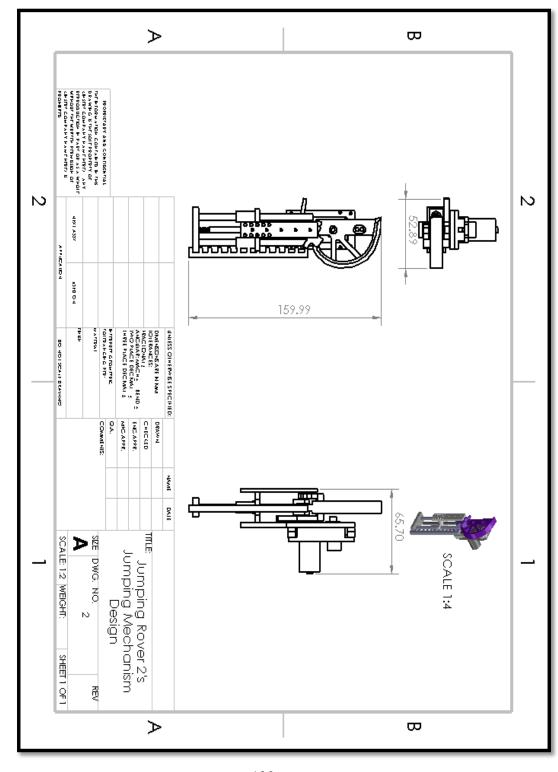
Jumping Rover 2's Jumping Mechanism Design
